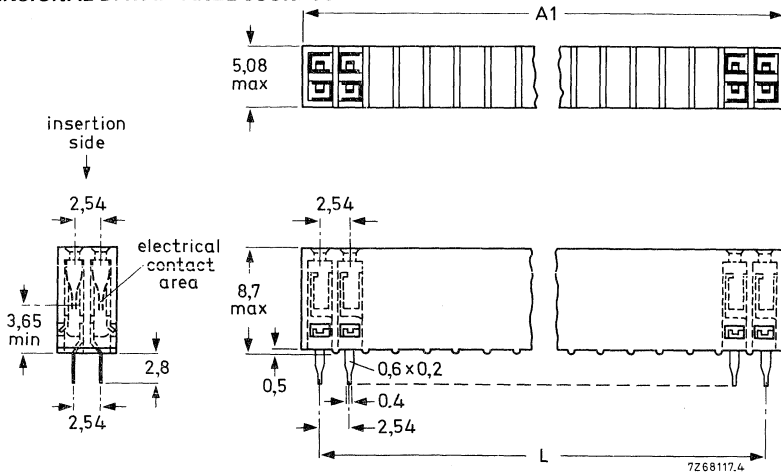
Panel socket, double row. See Table 2 for dimensions A1 and L.
